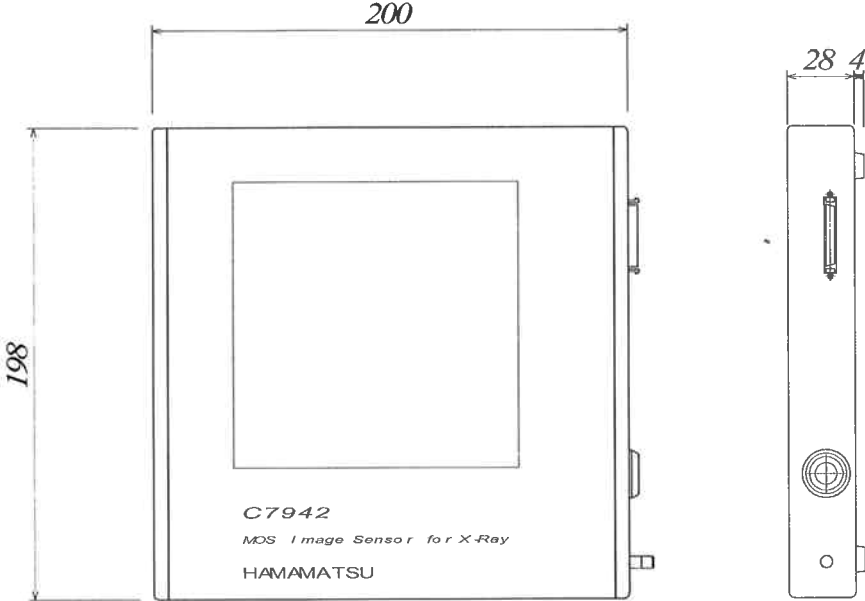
C7943 Physical Dimensions (unit : mm)
